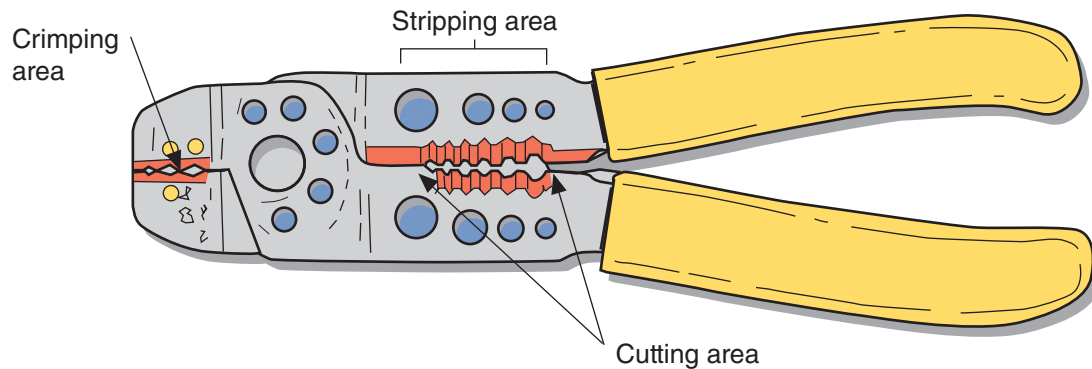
A typical crimping tool used for making electrical repairs.
